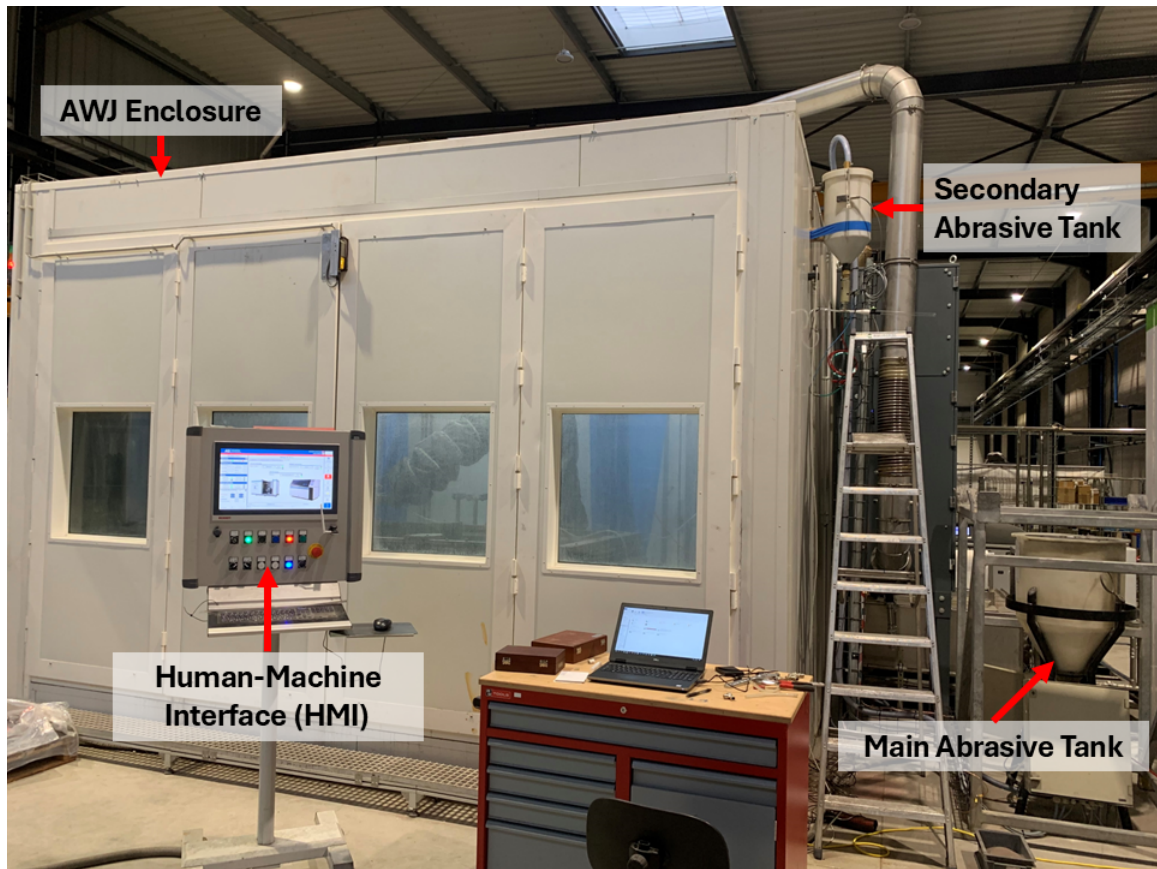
Photo showing the waterjet enclosure and data collection setup on the Aquarese 6-axis waterjet in France.
